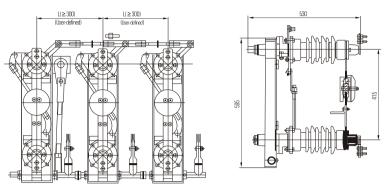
GW4-12D/630 tri-polelink assembly drawing
